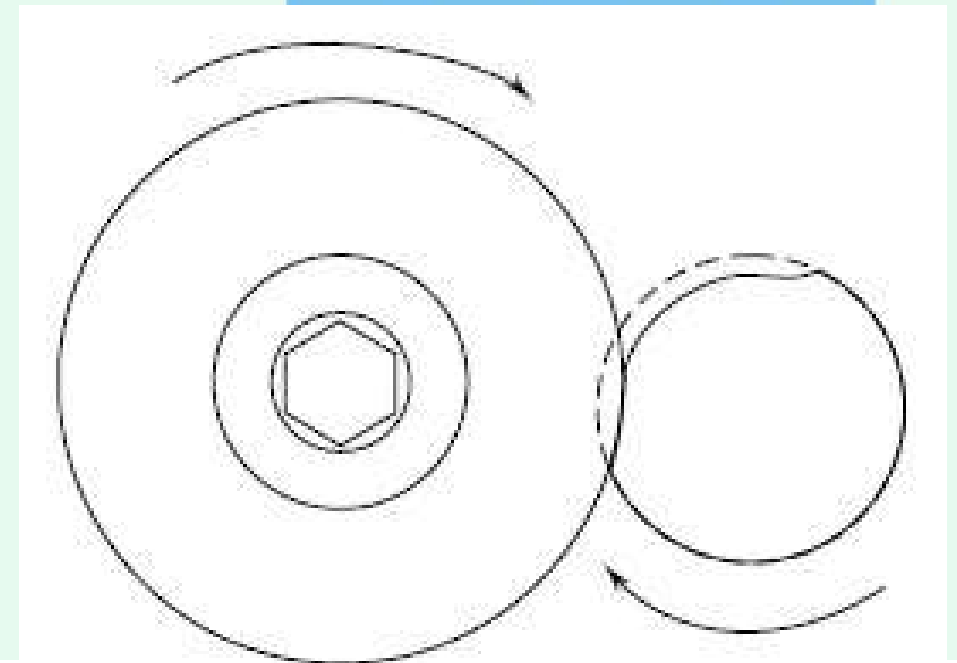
Relative motions of grinding wheel and the work in the cylindrical grinding operation
